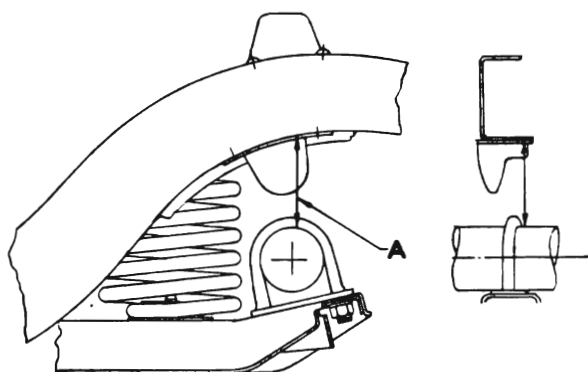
Rear Spring Trim Dimension—Series 50-70
